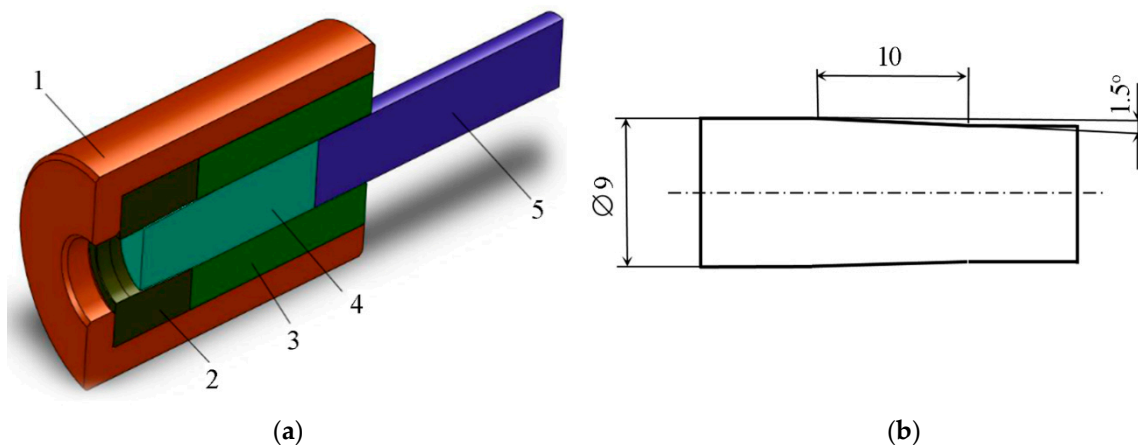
Illustration of the test: (a) experimental set-up (1—container, 2—steel die with a cone half-angle of 1.5° , 3—pipe, 4—specimen, 5—punch), (b) nominal dimensions of specimens after the test.
